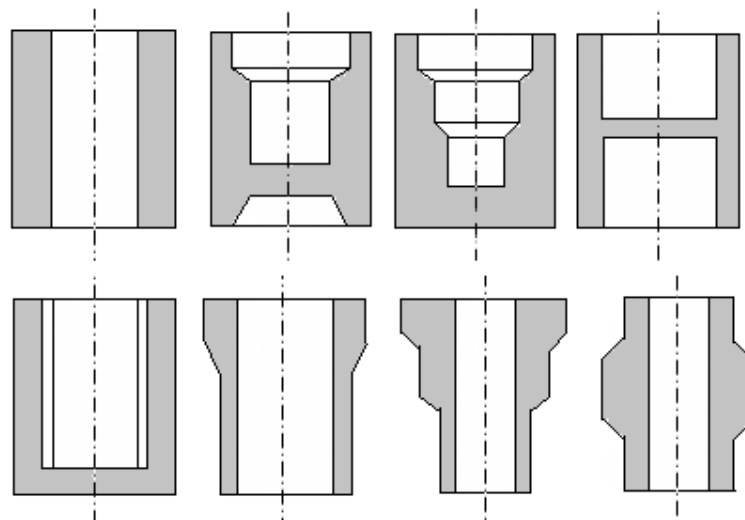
Closed forged (extrusion) tubular or cup shaped parts [2]
